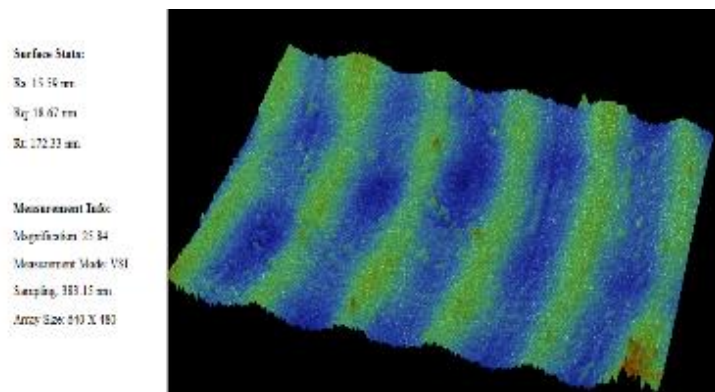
Workpiece surface under optimum lapping conditions in first trial (Ra:15.59 nm)
